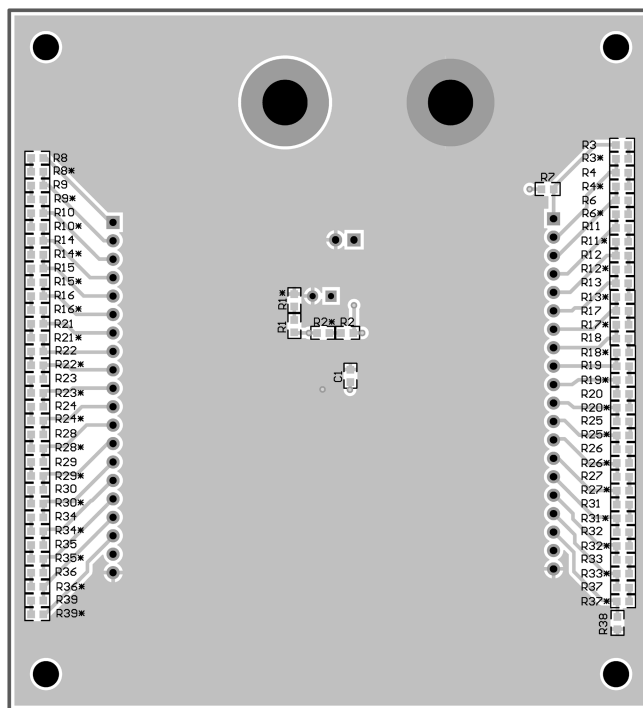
Layout of LM8207 Evaluation Board (Actual Size) — Bottom View
